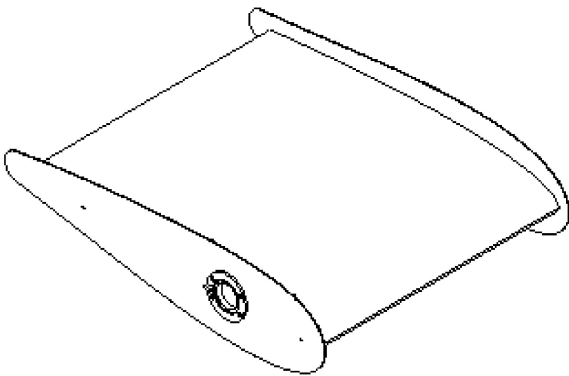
Sea Snail: hydrofoil assembly showing end plates
